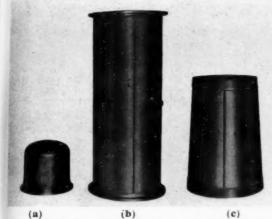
Typical welded fabrications. Three representadive components are depicted, all welds being readily visible.
